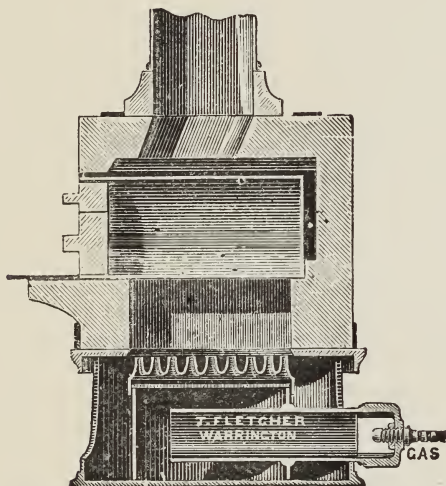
Muffle Furnace Section, showing internal arrangement.
